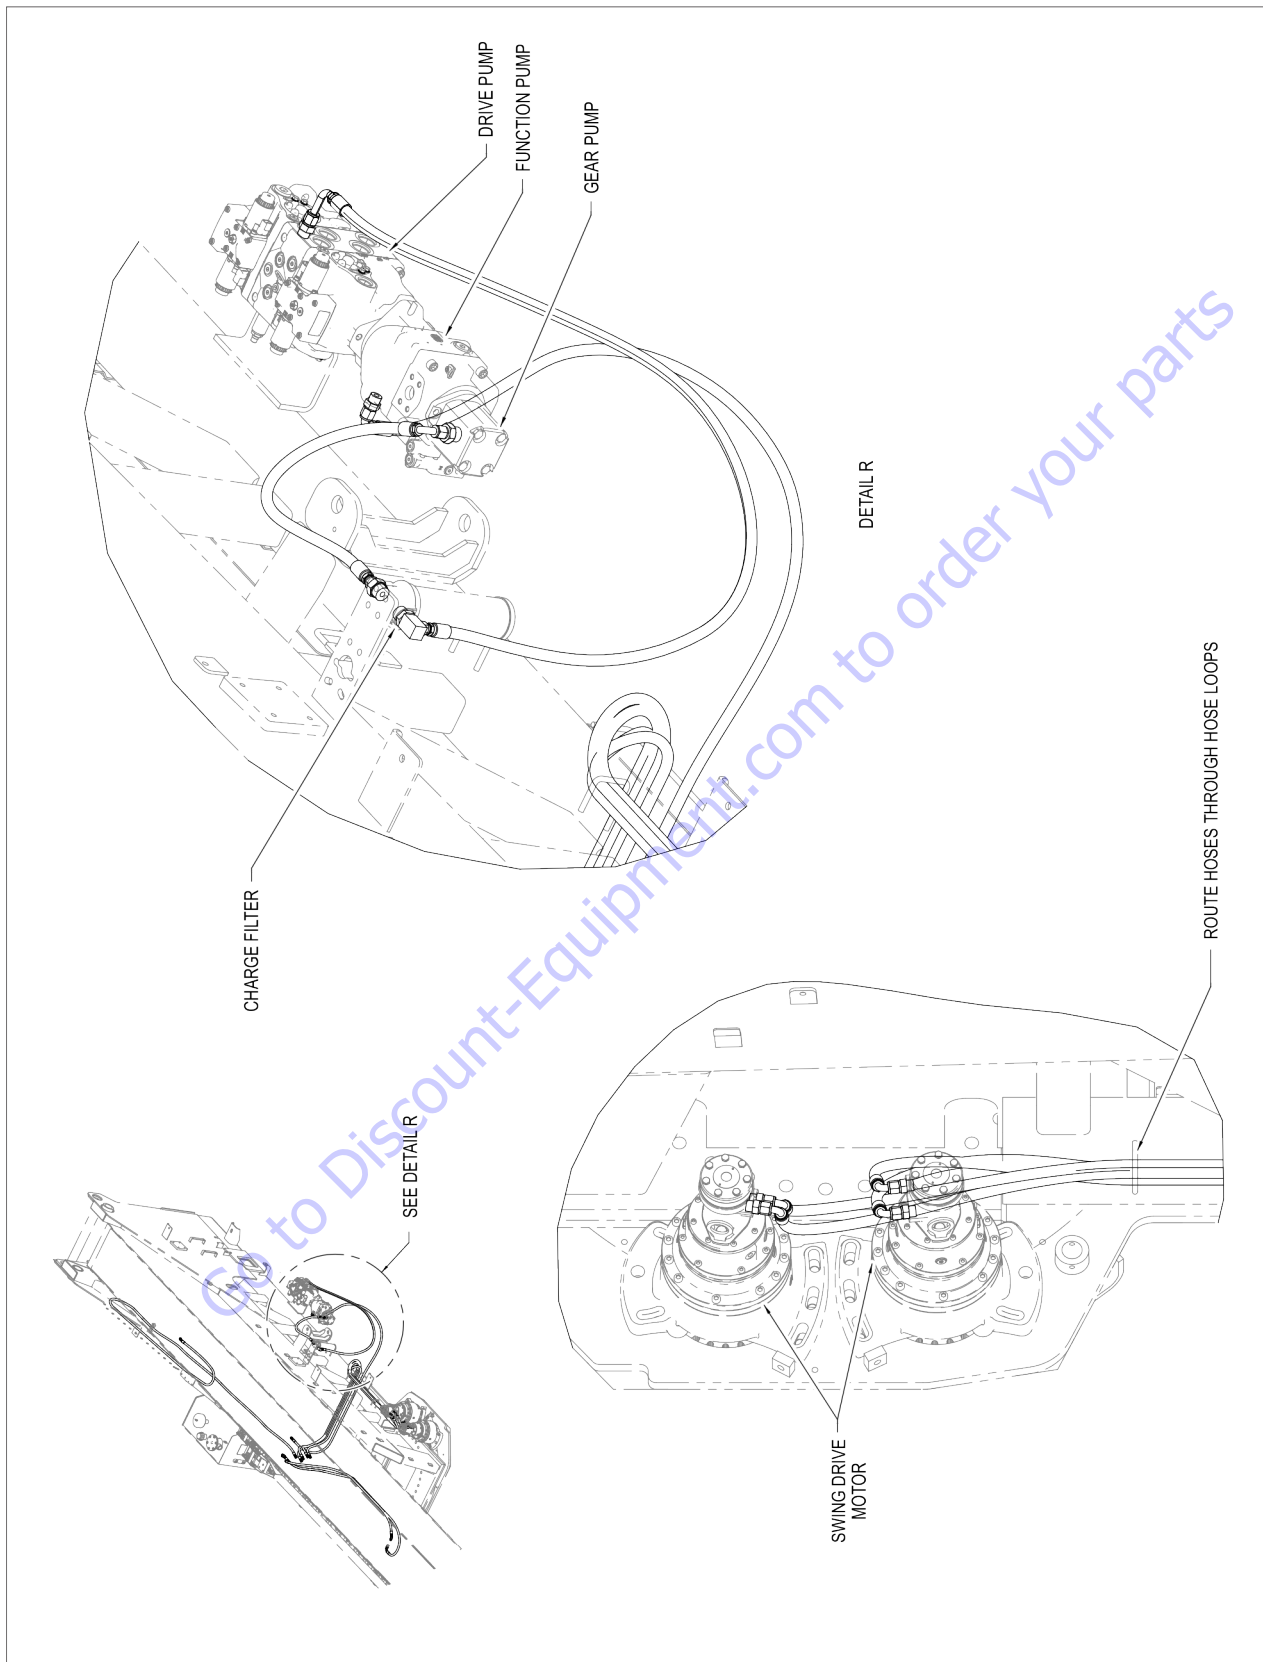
Hydraulic Hose Installation - Sheet 6 of 8
